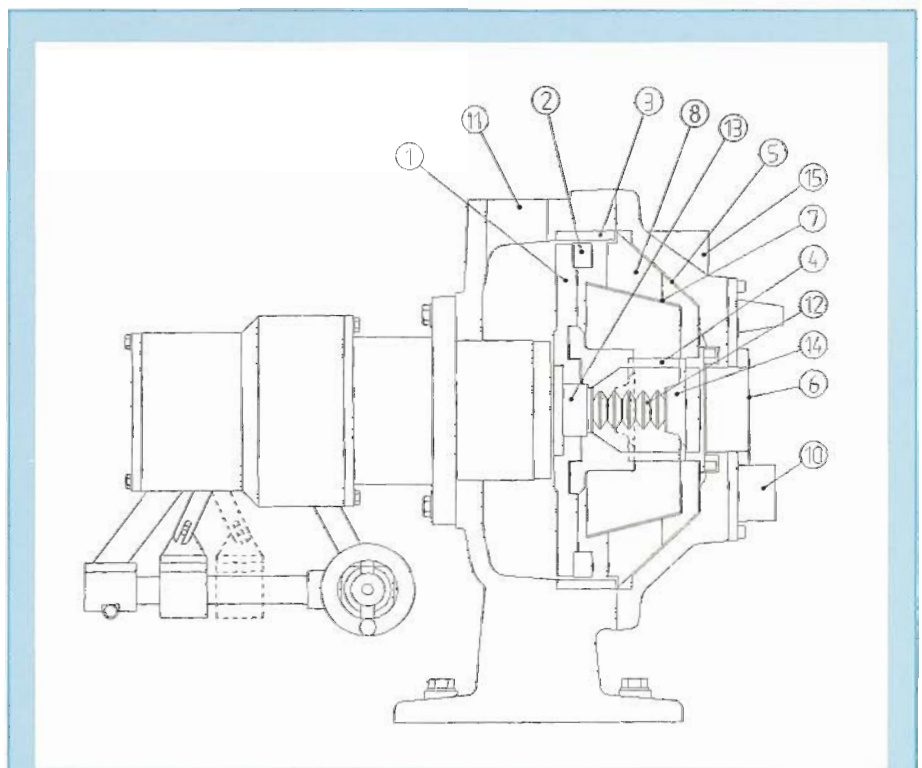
Sectional drawing of new classifier mill type "CP" with just one drive
